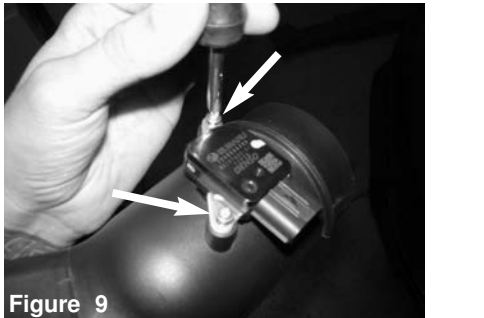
Use a phillips screw driver and remove the two screws on the MAF sensor located on the upper air box assembly. Remove the MAF sensor as it will be re-used in the Injen intake pipe.
